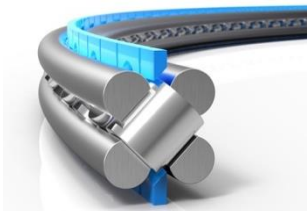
Wire race bearings of type LEW with cross-shaped rollers.
